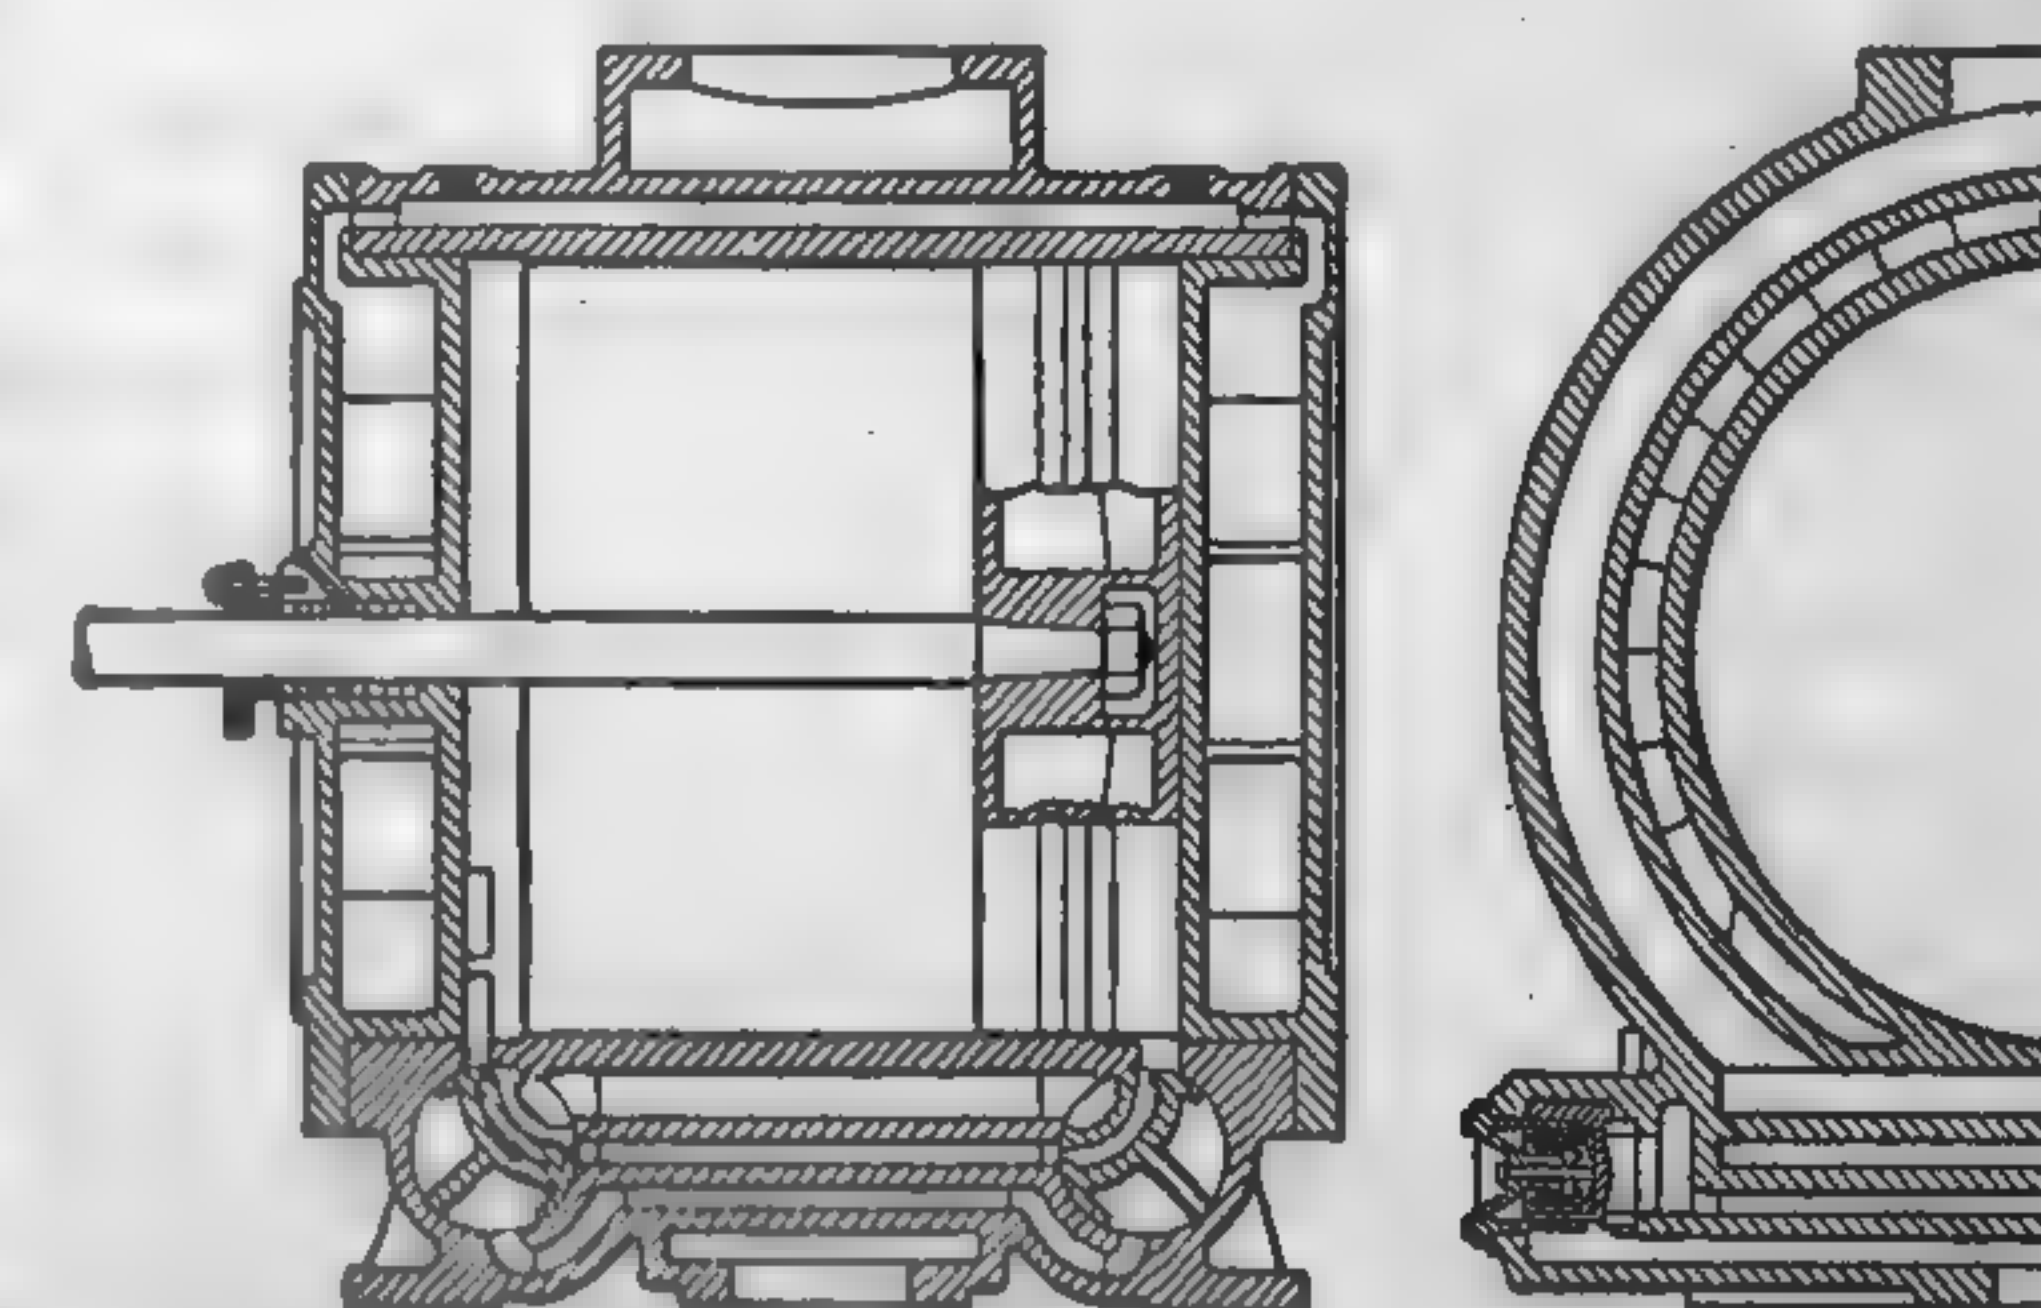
Air Cylinder Construction of Wheeler Dry-Vacuum Pump.
